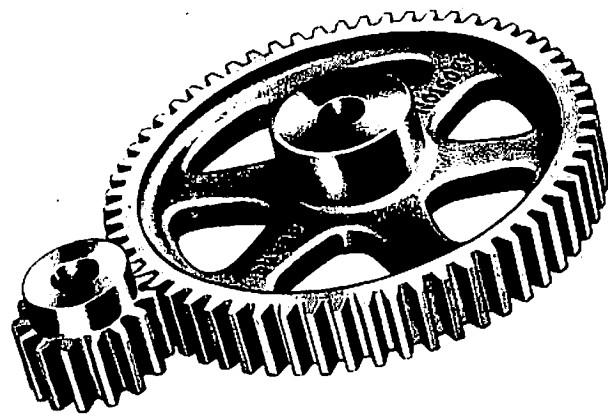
Spur gear/pinion gear (Courtesy Boston Gear)
